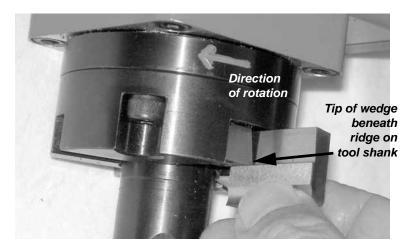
Slide the tool into the wedge-lock slot on the tool head. Make sure the tip of the wedge fits up against the ridge in the side of the tool, as indicated.
